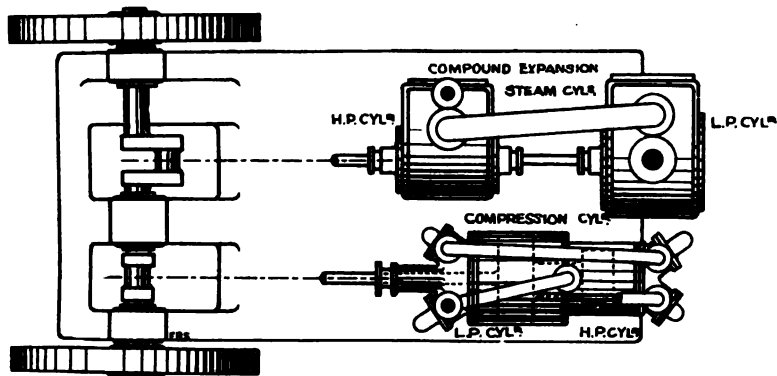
COMPOUND ENGINE AND COMPOUND COMPRESSOR (LINDE).
